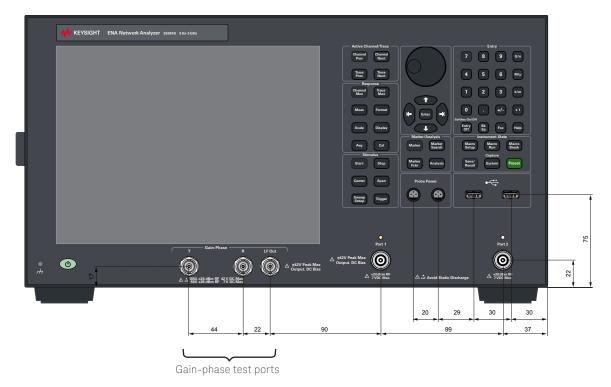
Dimensions (front view, in millimeters) <sup>1</sup>
